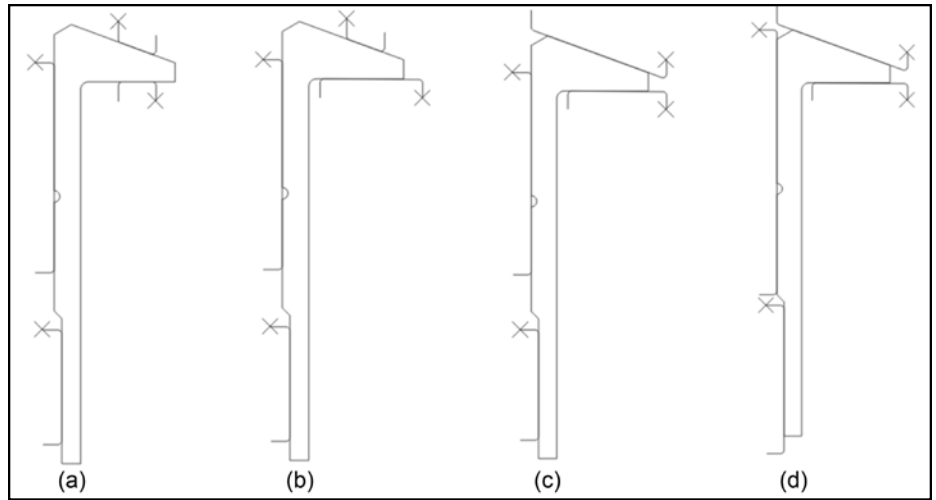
Press/Plug quenching tooling design. a) Tooling-1. b) Tooling-2. c) Tooling-3. d) Tooling-4.
